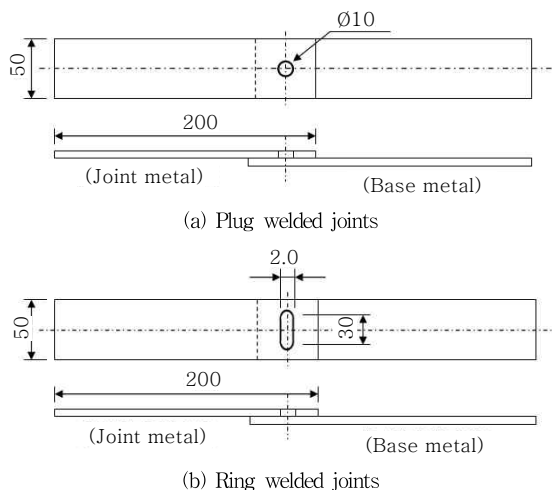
TS-type welded Specimens subject to tensile- shear load
